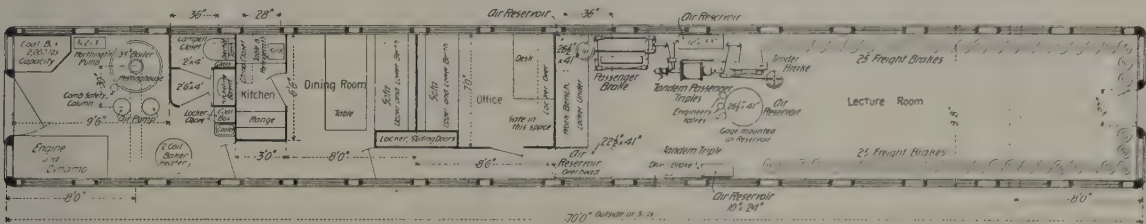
Floor Plan of International Correspondence Schools Air Brake Instruction Car. Interior View is Shown in Fig. 424.
